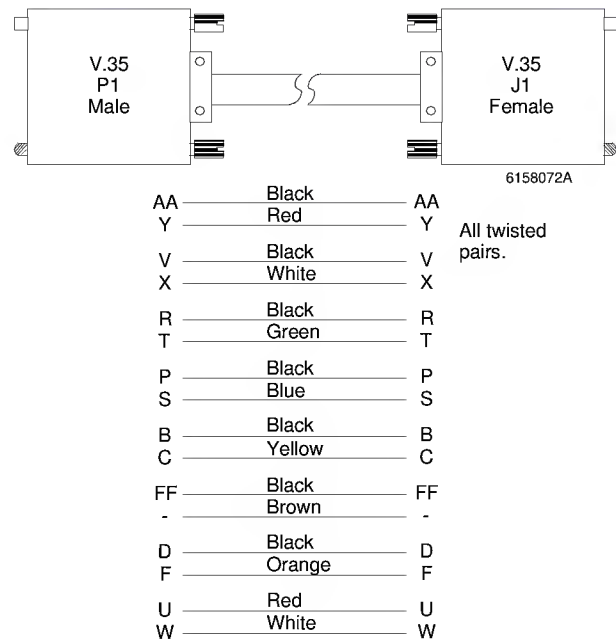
Cable, V.35 Extension; Male-to-Female, Shielded (905-7177-XX)
